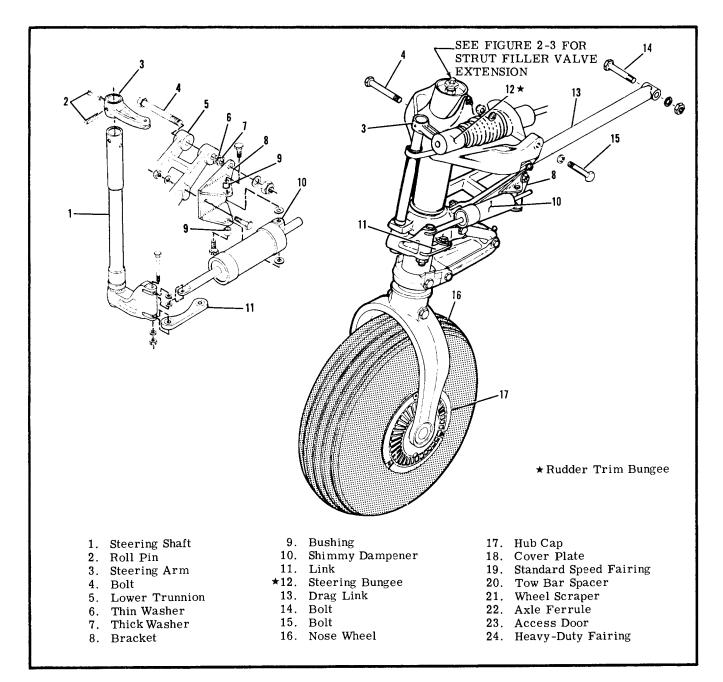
Nose Landing Gear (Sheet 1 of 2)
